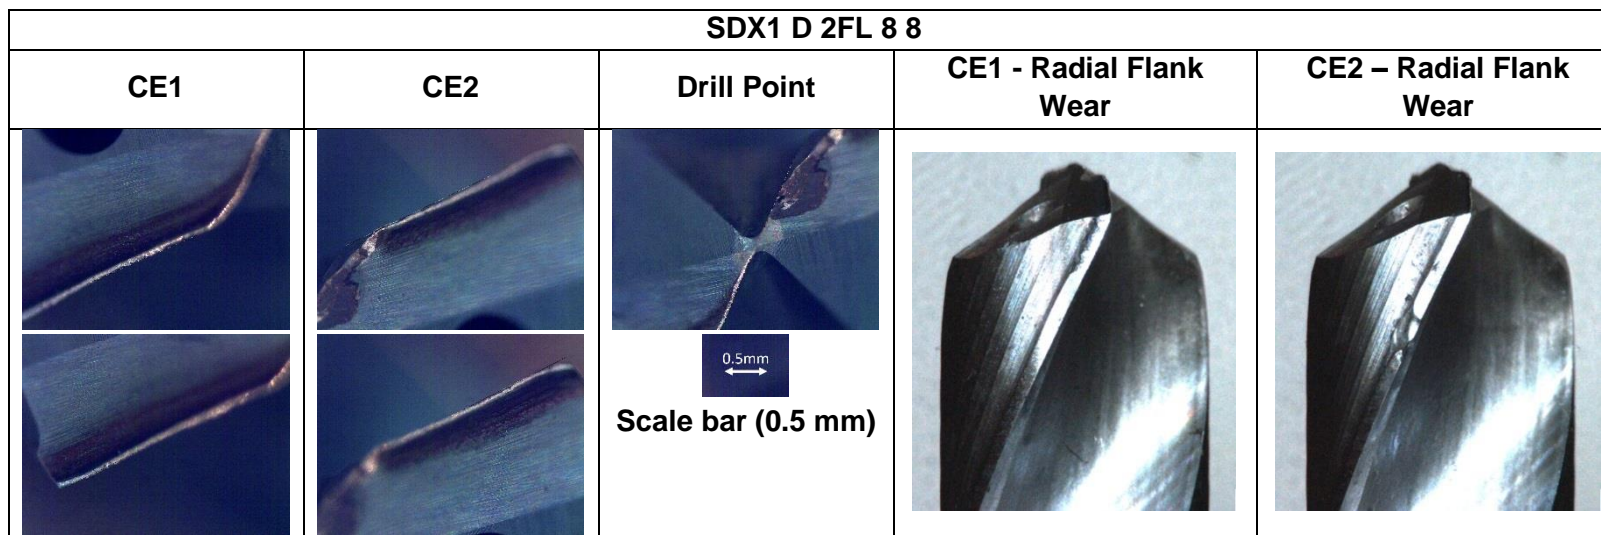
Flank wear and chipping observed after drilling 166 holes
